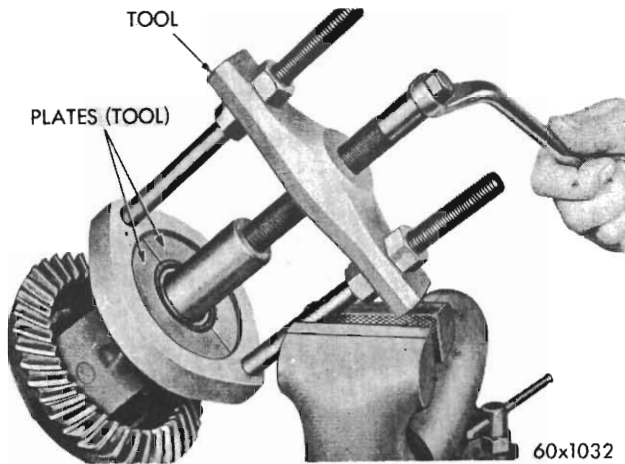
Removing differential carrier bearing using Tool E1673.
